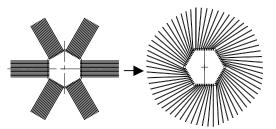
Manufacturing method for hexagonal Crimped Fin heatsink.
